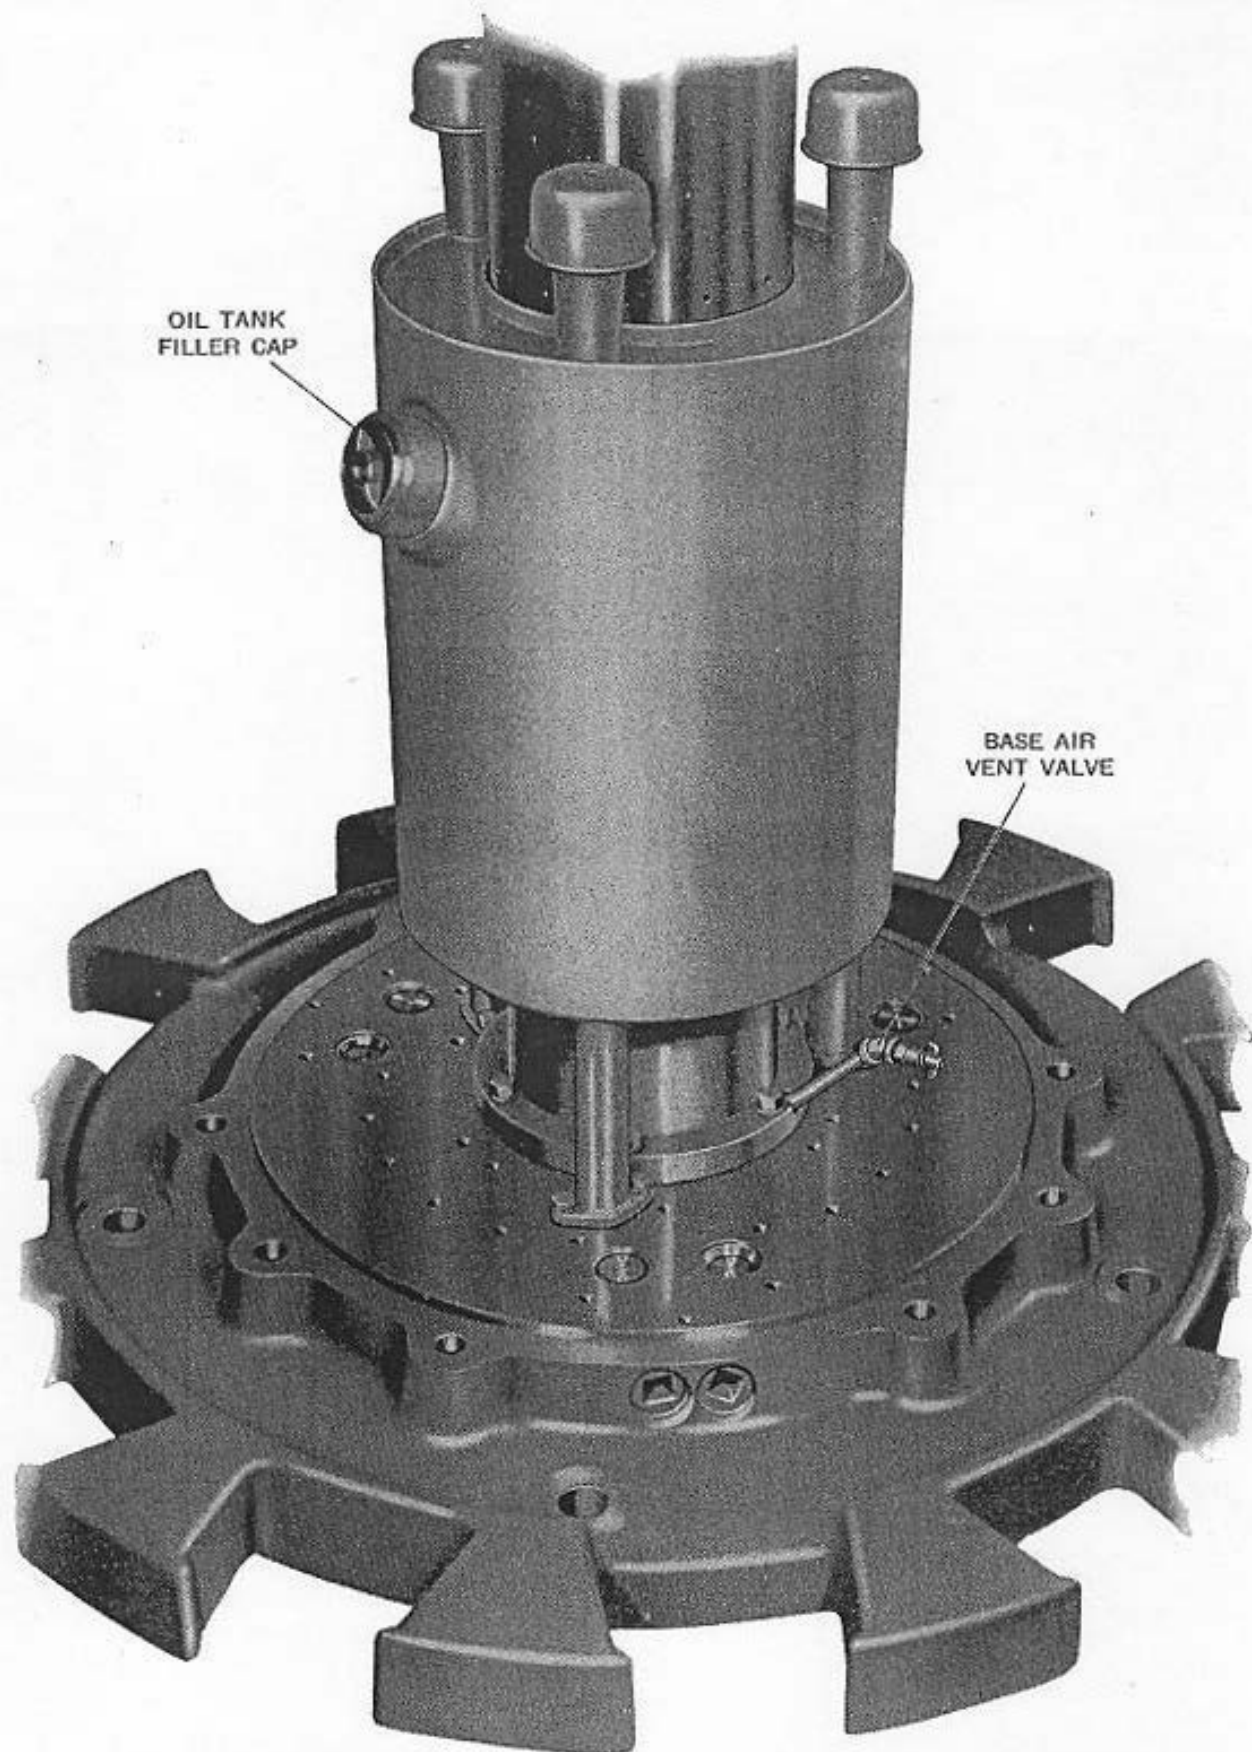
Position of oil tank filler cap in relation to base air vent valve
